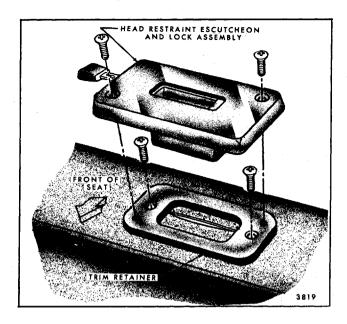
Front Seat Back Head Restraint Retainer, Lock and Escutcheon - E, K and X Styles
